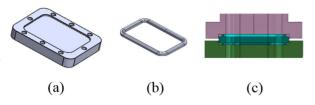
Drawings of the (a) Rectangular flange, (b) gasket, and (c) cross section view of the flange sealing
